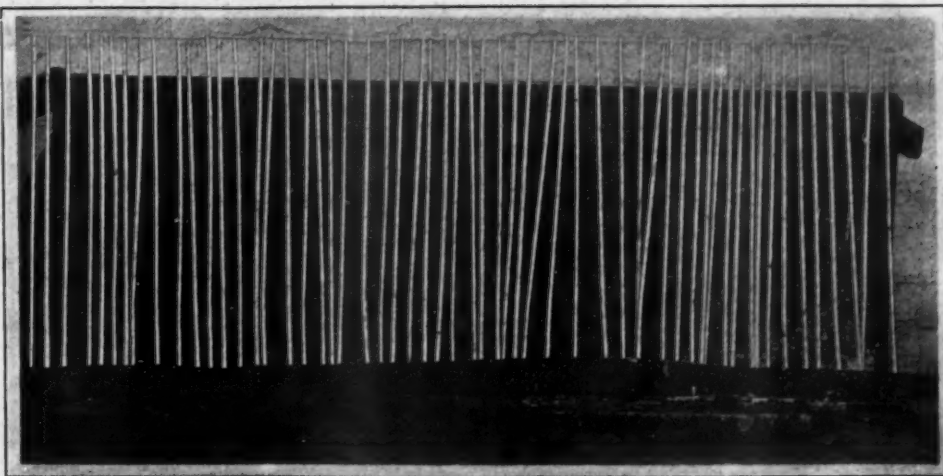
Tubes, after they are cut to length, dipped in solder, and placed in a rack to drain and cool off before they are assembled
